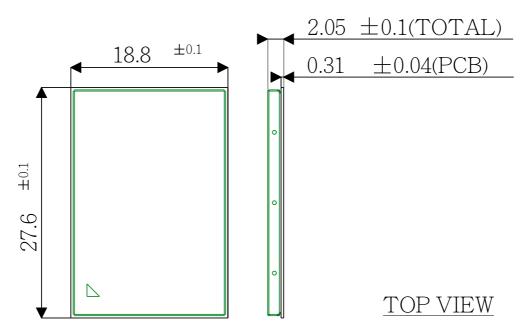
Dimensions of ELS31-VA/ELS51-VA (all dimensions in mm)
